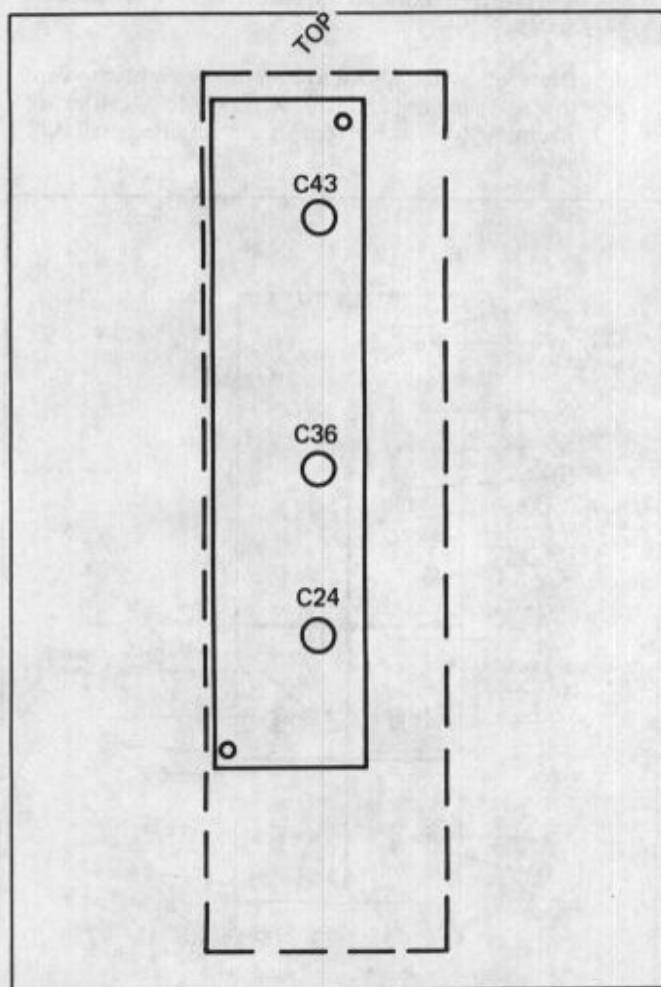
Trimmer Access Hole Locations, A12 thru A21
